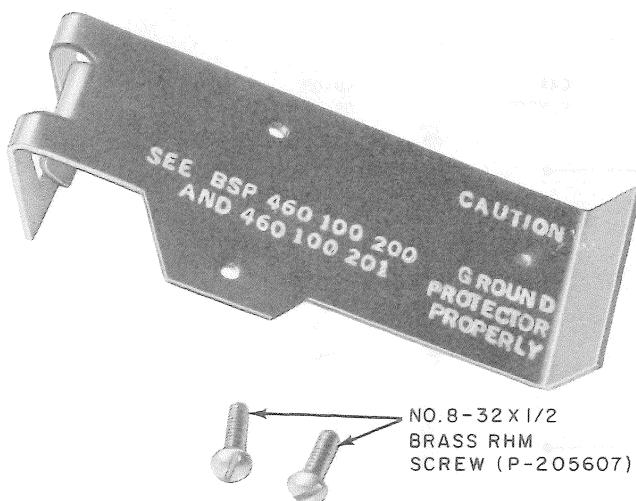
7A Clip For Mounting 123A1A Protector and 840362024 Capacitor Board Assembly in Panel Phone
